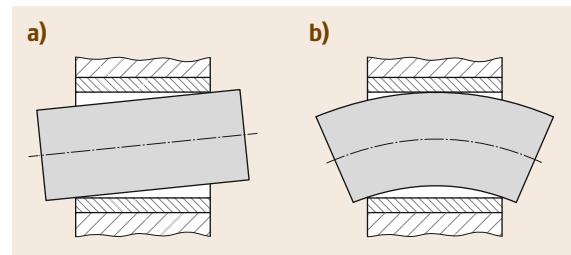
,b Edge wear in rigid bearing bodies: (a) shaft misalignment in an end bearing and (b) shaft curvature in a center bearing
